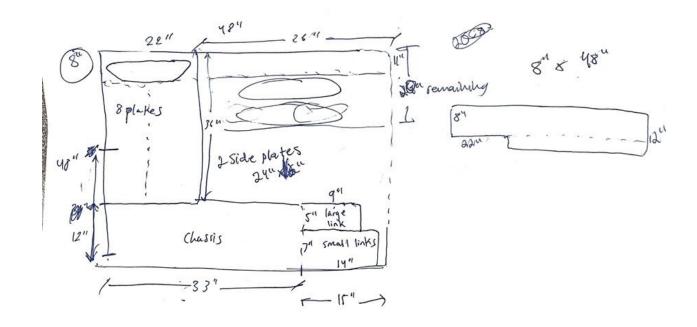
Water jet cutting plan to reduce wasted material and maximize the amount of parts the team could cut out of the sheet metal
